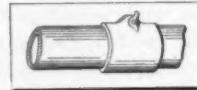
Type of clamp joint used to advantage in pipe fitting
